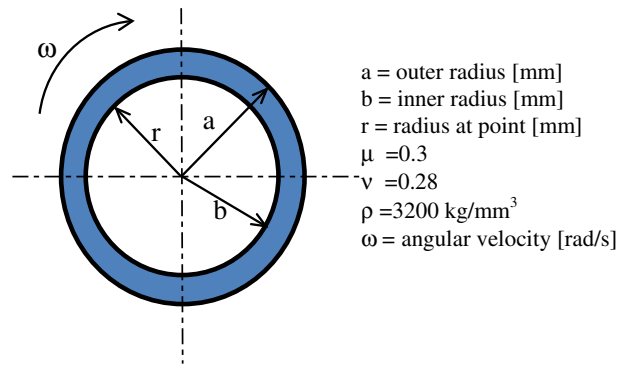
Two-dimensional of rotating disk with a circular hole.
